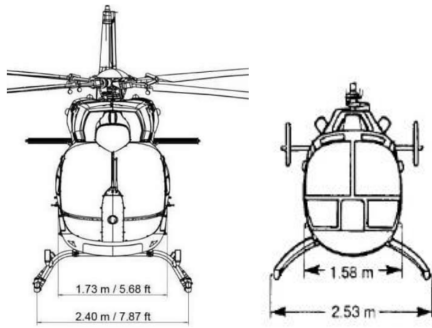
Comparison of BO105 (Ref. 11) and H145 skid dimensions (Ref. 10)
